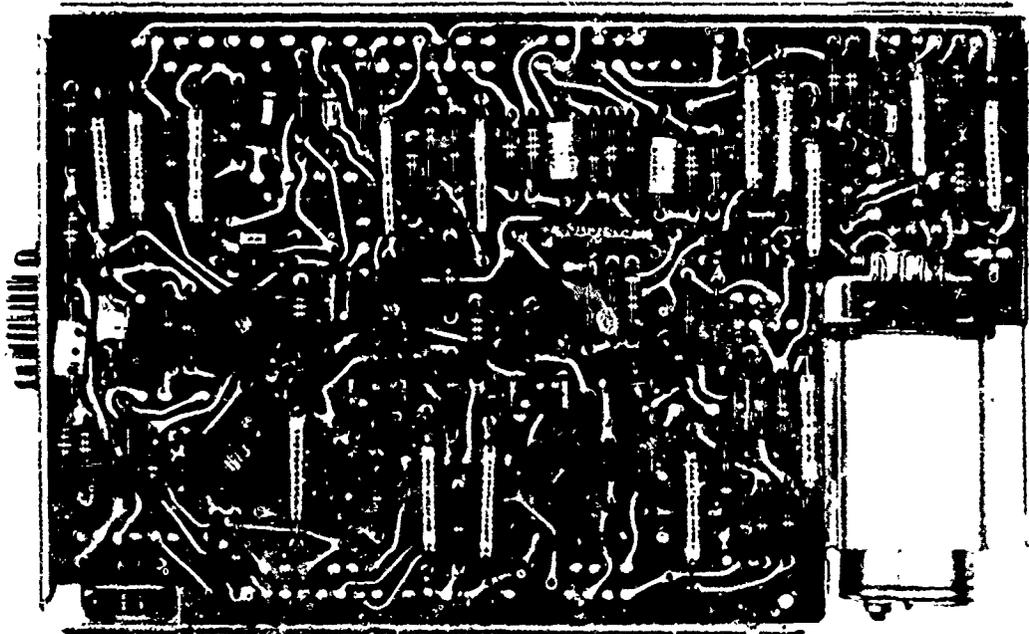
Both Sides of a Printed Wiring Board Supported by a Sheet Metal Chassis
